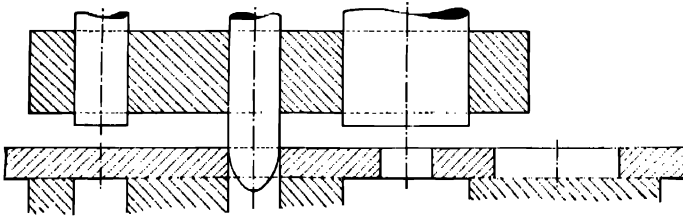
Pilot-pin method of centring pierced hole before blanking.
